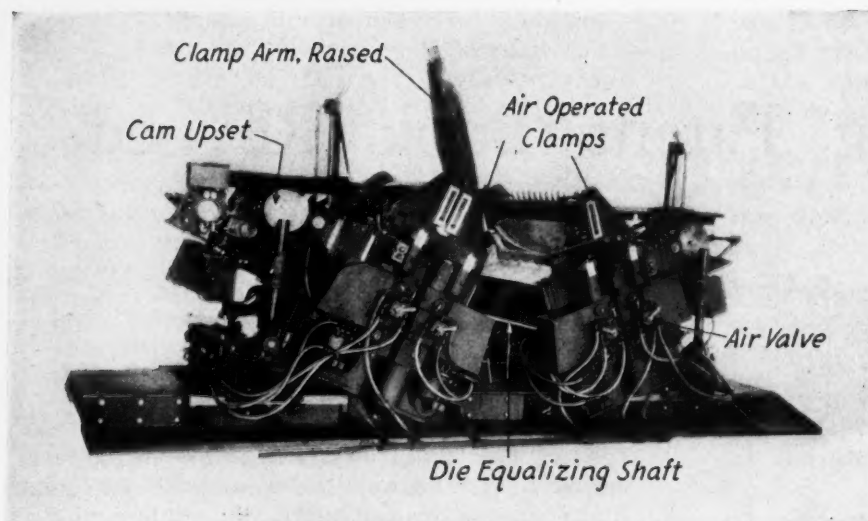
Electrical devices and mechanisms constitute the basis for design of this resistance flash welder for automobile bodies
